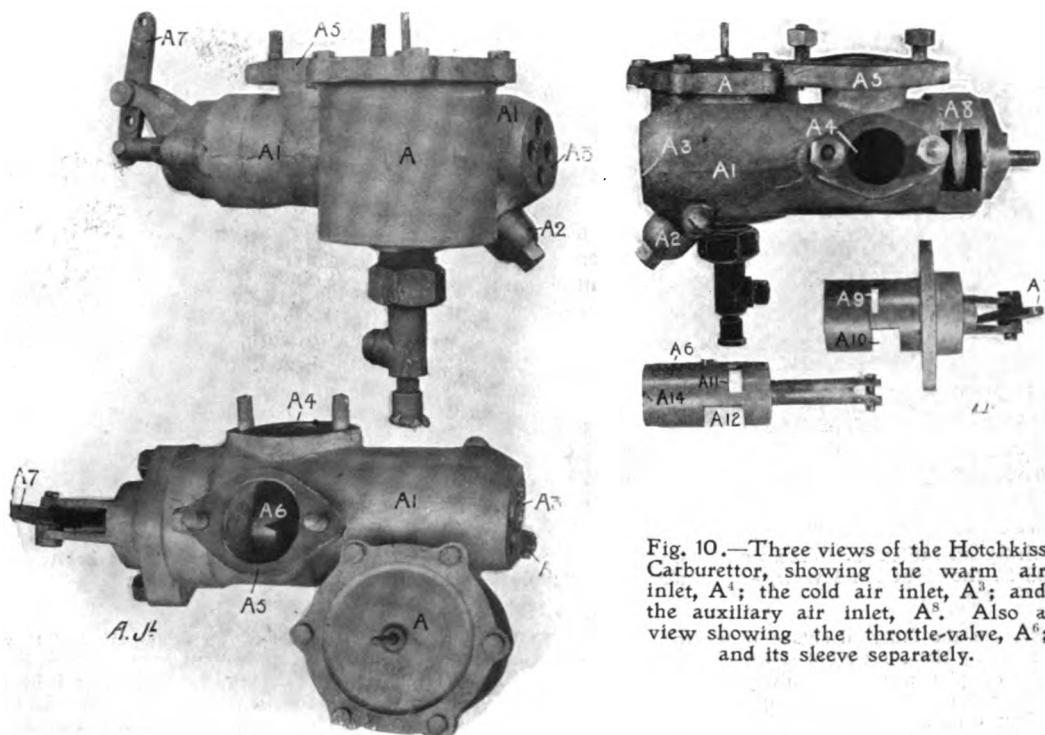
Three views of the Hotchkiss Carburettor, showing the warm air inlet, A⁴; the cold air inlet, A³; and the auxiliary air inlet, A⁵. Also a view showing the throttle-valve, A⁶; and its sleeve separately.
